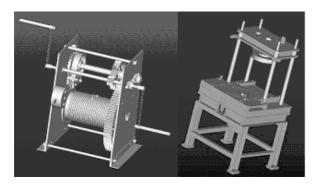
Assembly design examples for 3rd year students (Left: manual winch, right: bearing setting tool)
